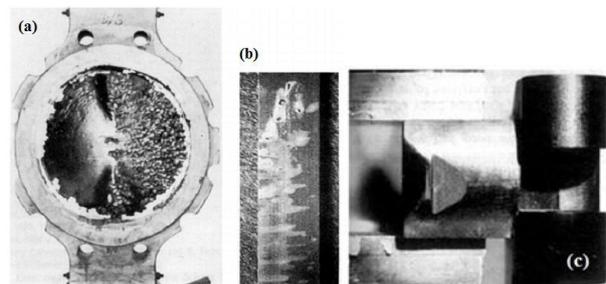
Examples of wear, (a) Erosion damage on a butterfly valve component. (b) Fretting damage on a friction band. (c) Sliding wear on a cam follower
